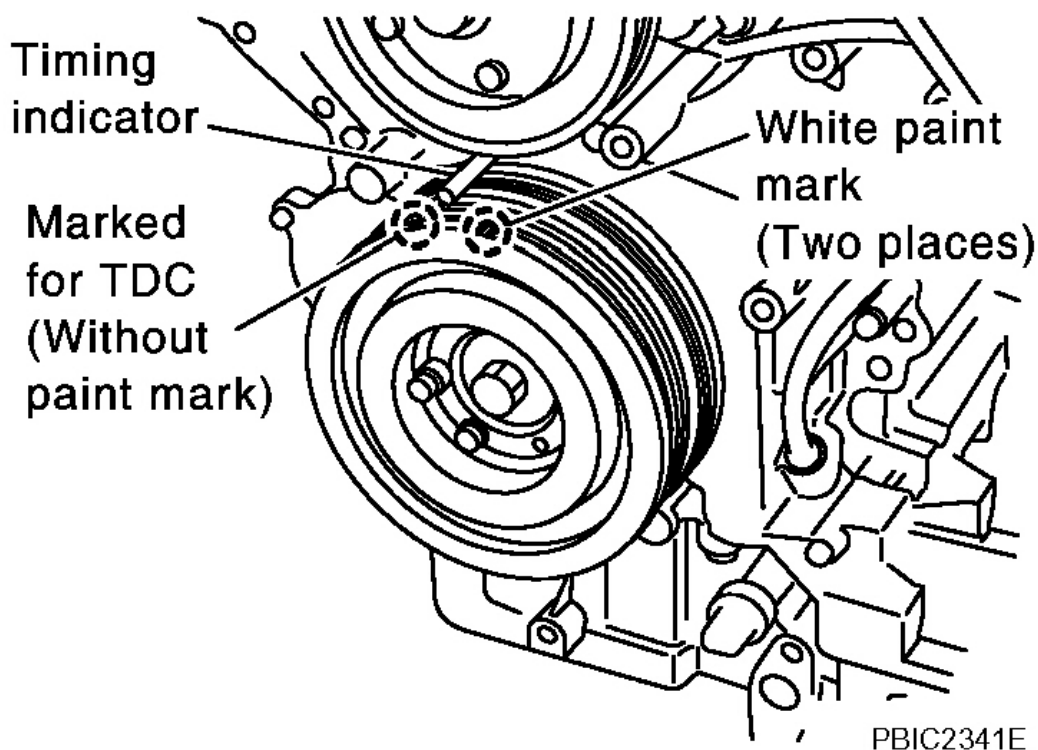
Rotating Crankshaft Pulley To Align TDC Identification Notch With Timing Indicator On Front Cover
